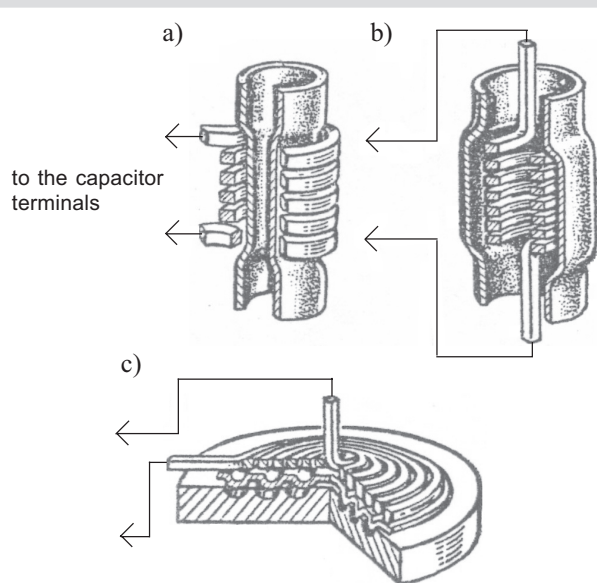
Effects used during electrodynamic metalworking: a) tube compression; b) tube expansion; c) sheet pressing
